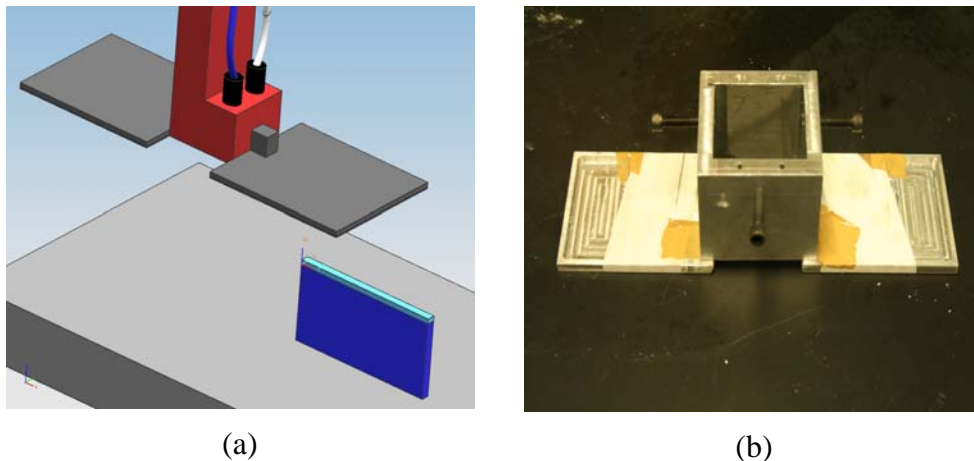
The chilling plate investigated: (a) the CAD model and (b) the actual plate
